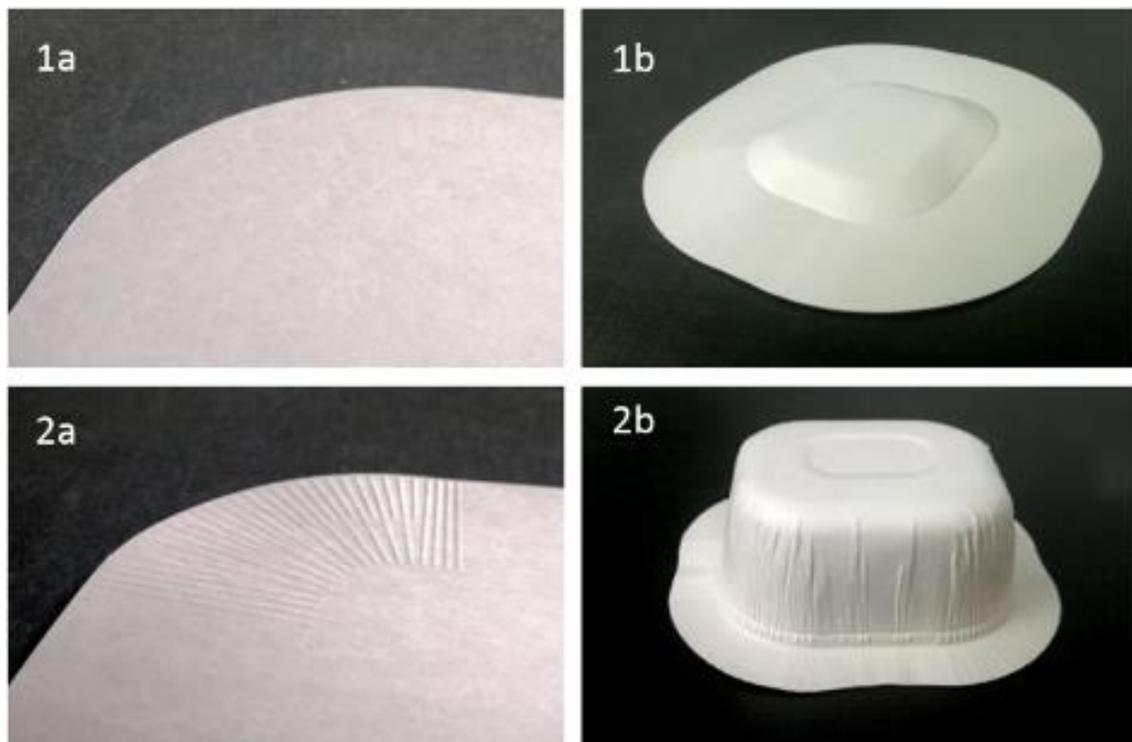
Methods of press-forming. 1a) a smooth blank for fixed blank press-forming, and 1b) a tray with a depth of 7 mm formed using the fixed blank, 2a) a creased blank for sliding blank press-forming, and 2b) a tray equipped with a bottom indentation and a depth of 35 mm formed using the sliding blank.
